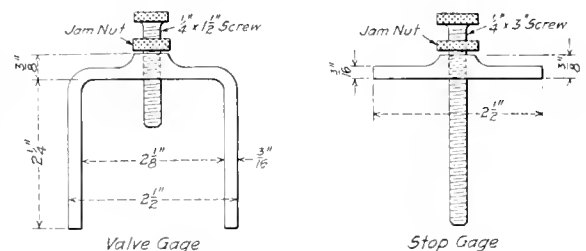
Gages for Determining the Lift of Lower Inlet and Discharge Valves
